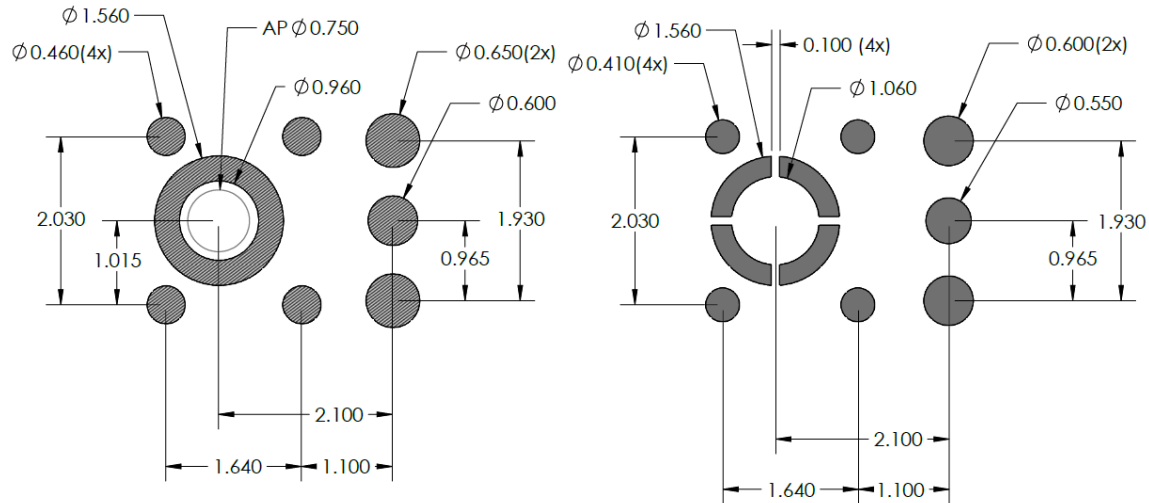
VM1010/VM2000 PCB land pattern (left) and solder stencil pattern (right)
